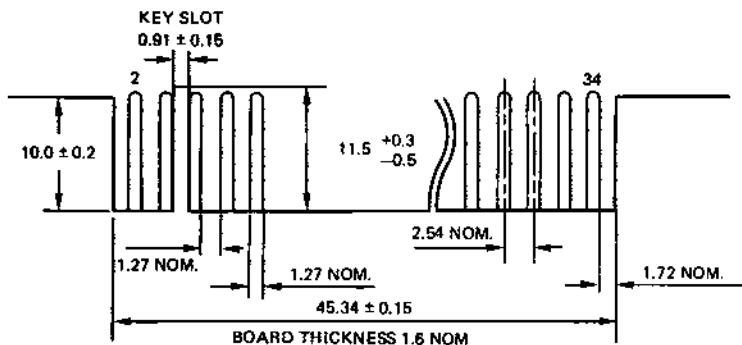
Connector J1 Dimensions (mm) and Pin Numbers
